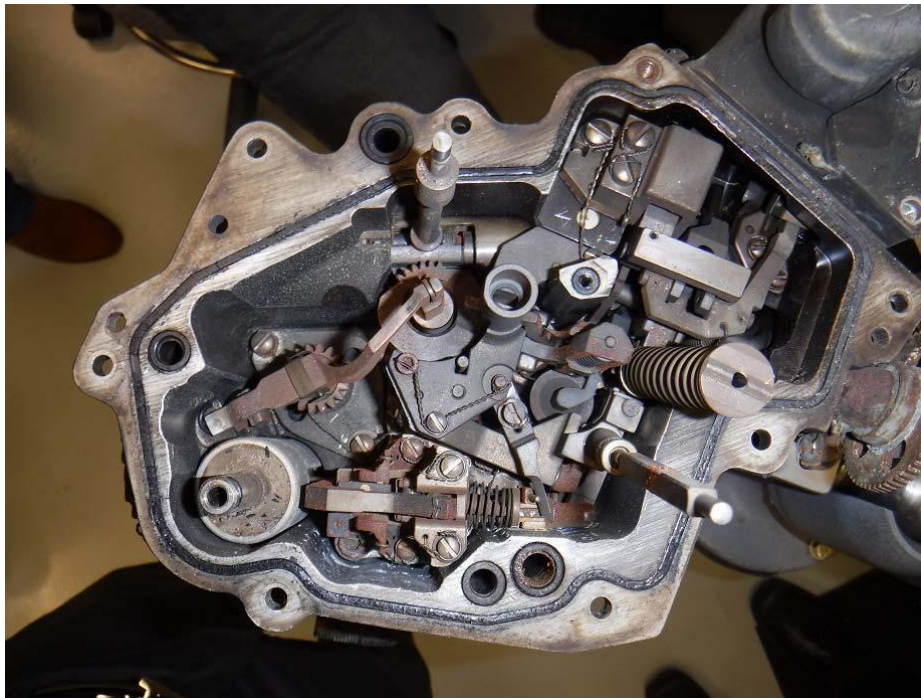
The internal components of the No. 1 fuel control after removal of the cover.
